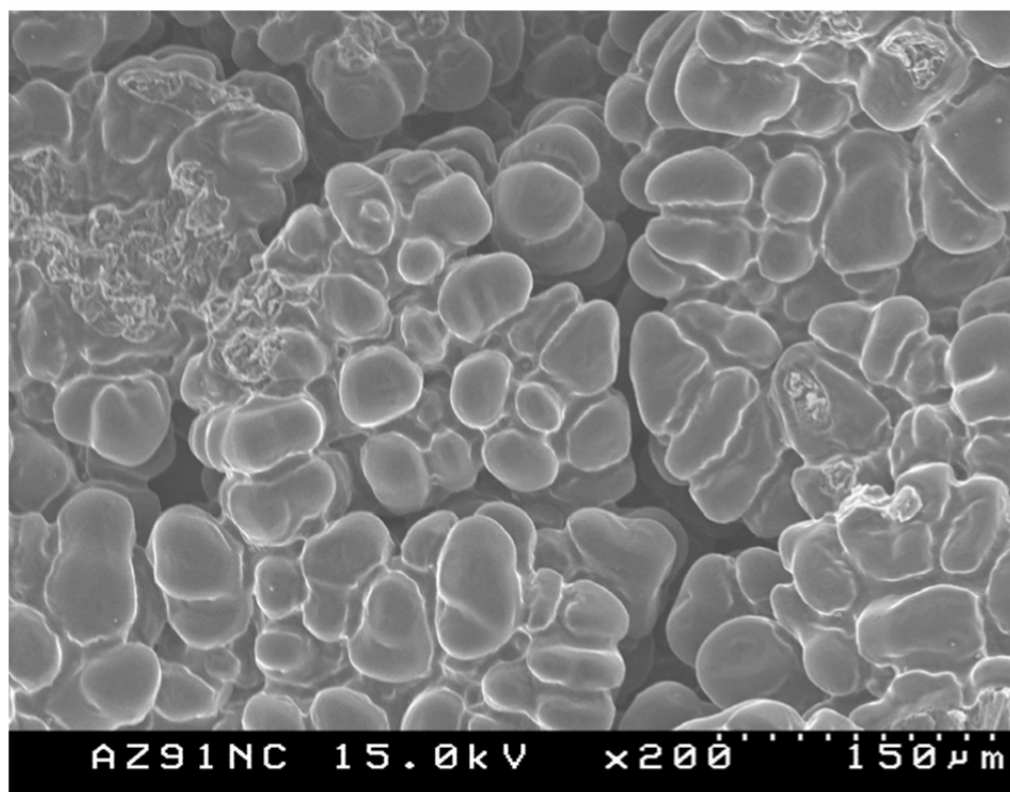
SEM pictures of the tensile bar fracture surface from an unchilled AZ91 bar casting.
